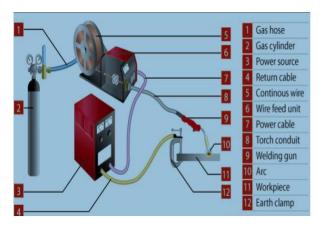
Gas metal arc welding (GMAW) [6].
